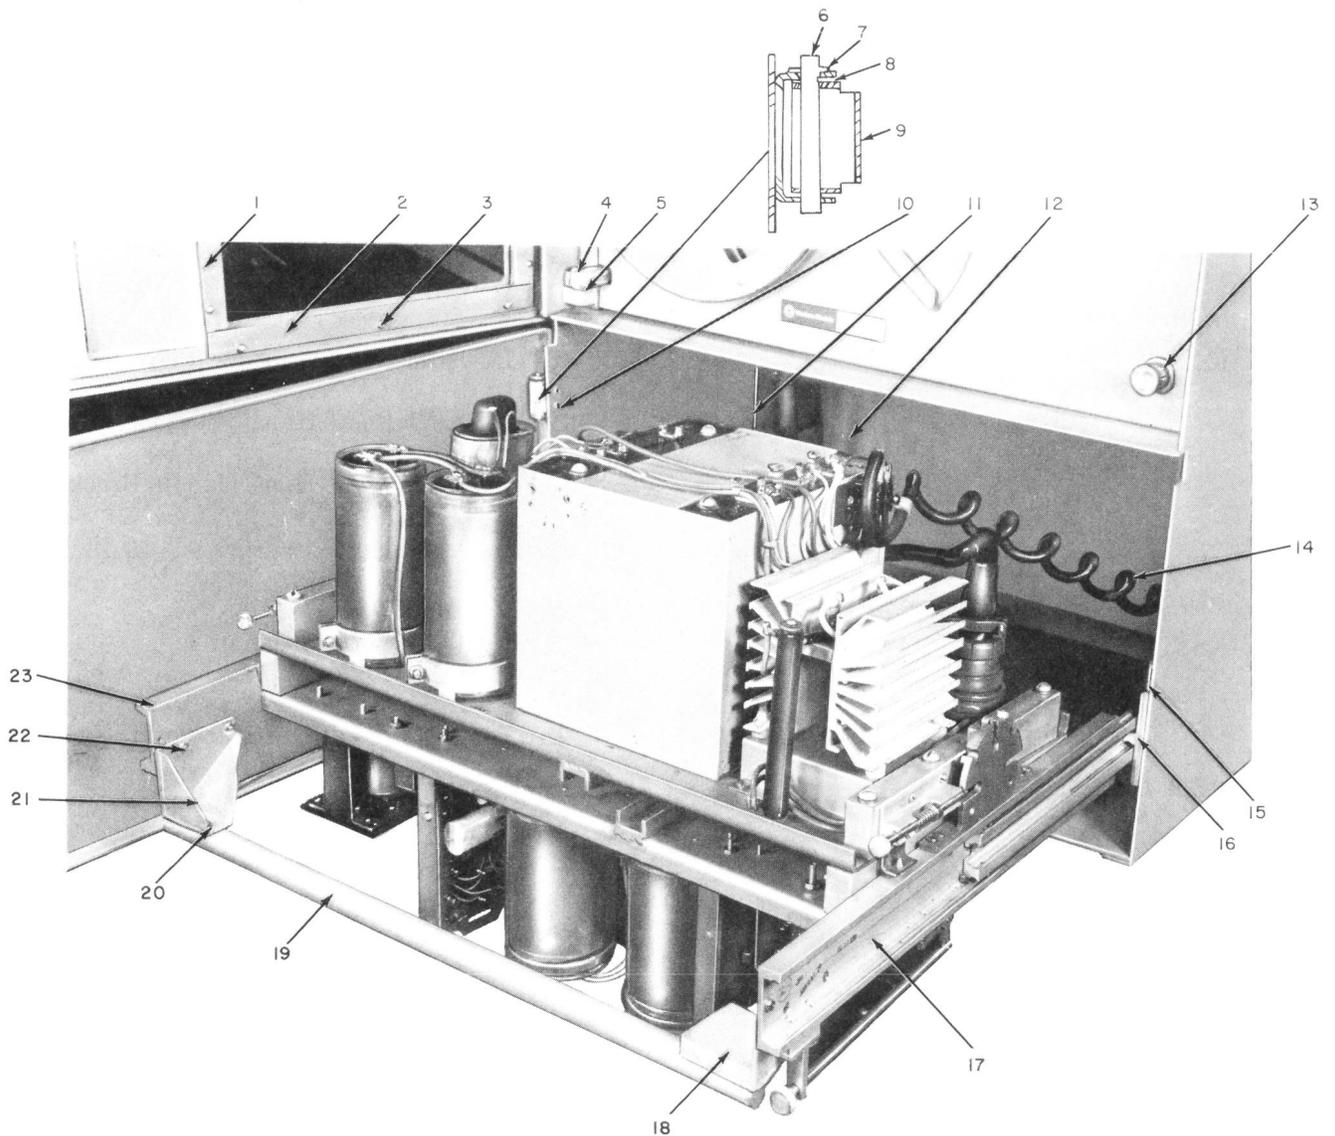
Partial View of Cover Door Inside With Power Supply Cover Door and Rack (KS-20573, L1, Rectifier Shown Installed) (Sheet 1 of 2)
